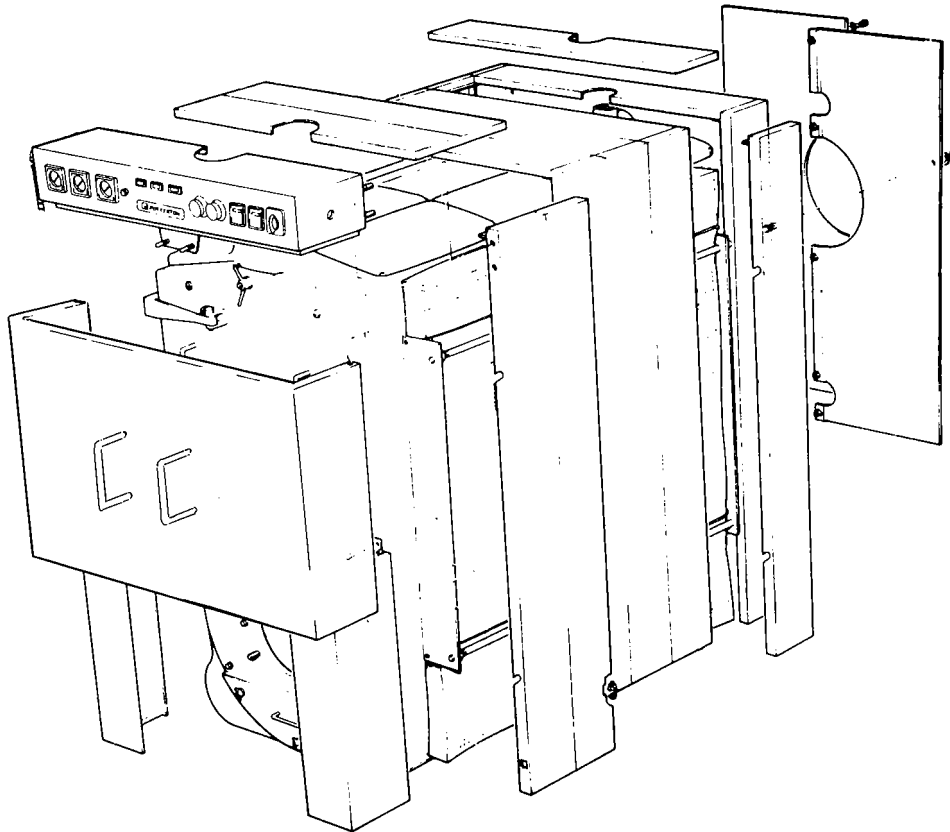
Exploded View of Insulation and Jacket showing Optional Instrument Panel
